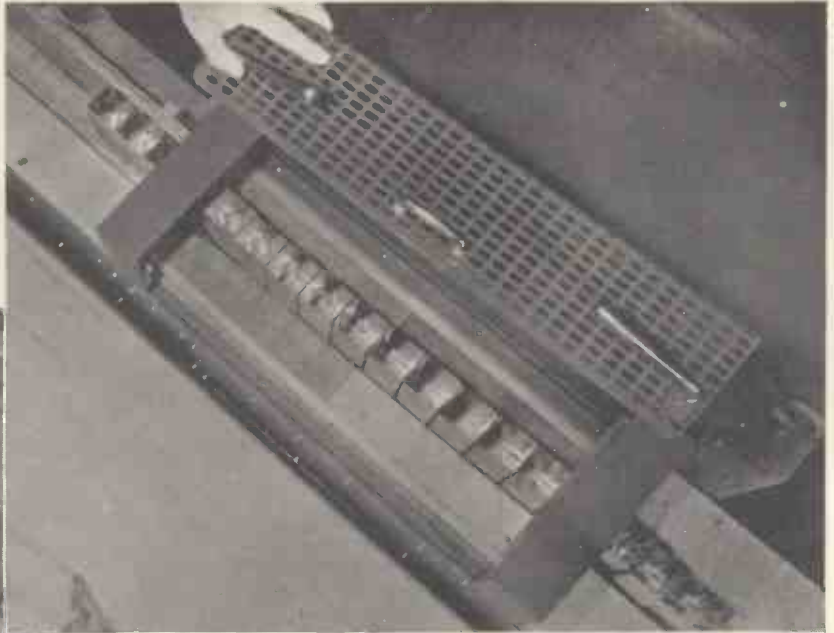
(above). Overall arrangement of the soldering conveyor assembly, showing the oil-filled tank condenser projecting below the conveyor housing.
